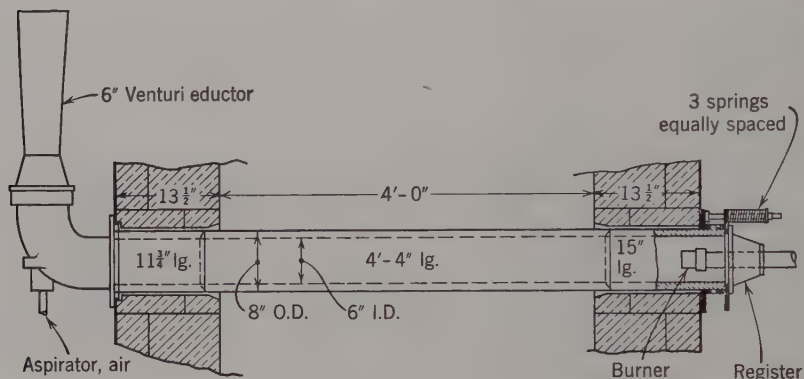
Radiant tube of silicon carbide. Courtesy of Gas Machinery Co.
